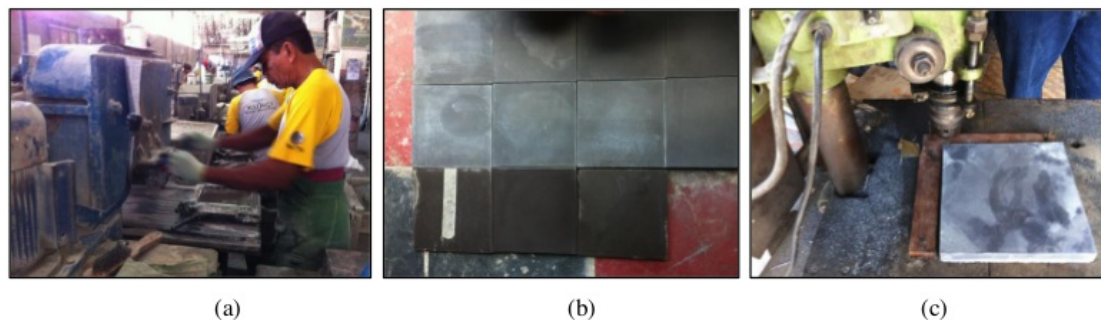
(a) the reproduction of similar floor tiles; (b) comparing the original floor tiles with the replica; (c) a hole was made on the replica floor tiles
